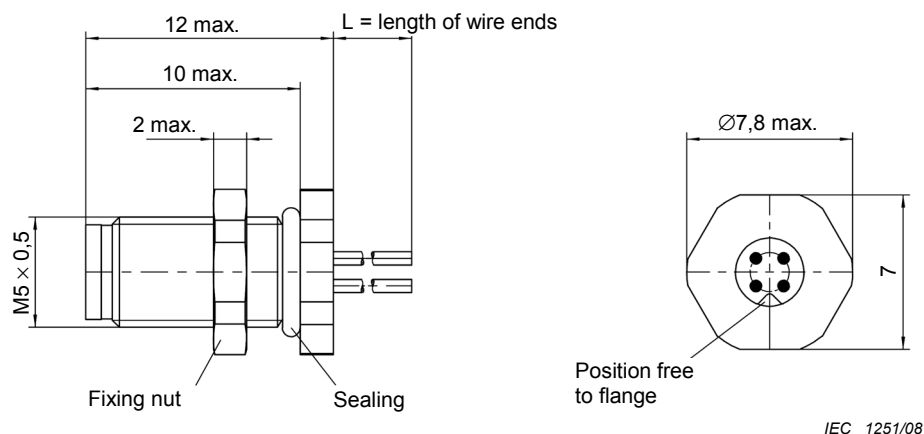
Fixed connector, male contacts, mounting with thread M5 x 0,5, with wire ends, single hole rear mounting, thread M5 x 0,5, mounting orientation
